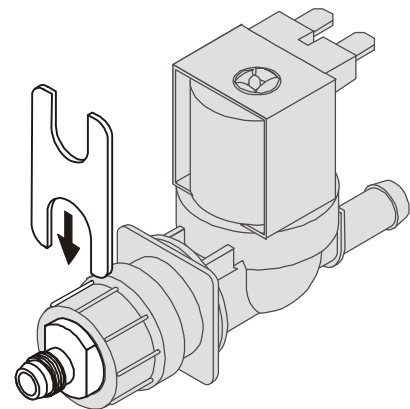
Use wrench #86660 to Attach or Undo the Inlet Fitting Flare Connection
